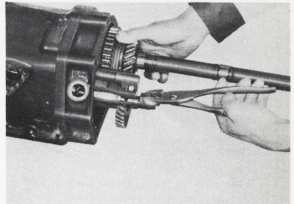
Pulling Out Fifth & Reverse Shift Fork Shaft
